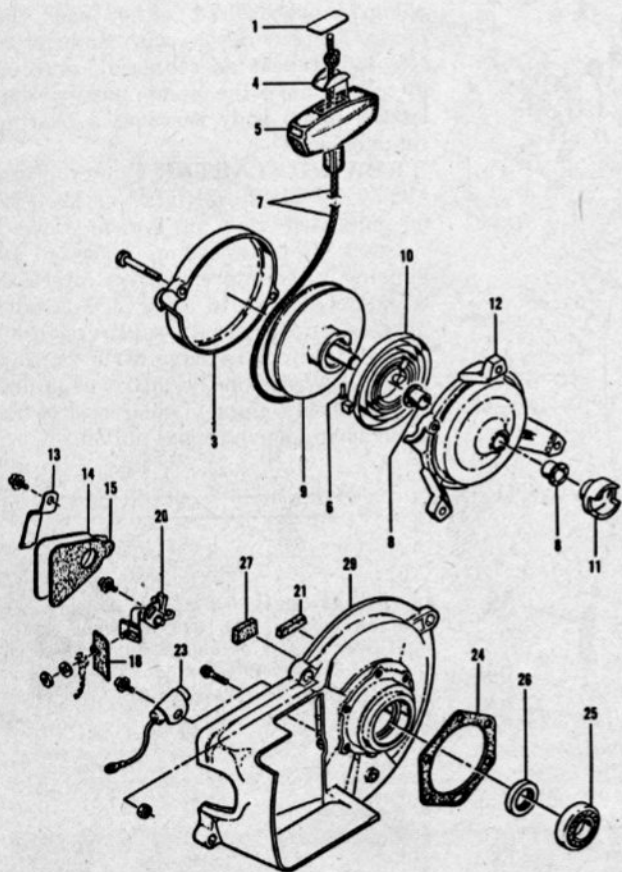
Crankcase cover and starter assembly typical of those used on models 200, 250, 300, 380, 450, 550, 650 and 660. Models 795 and 795L with serial number prefix (10) also use starter shown.
